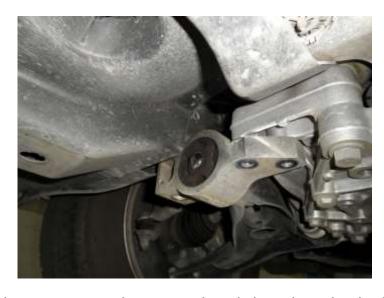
Remove Front lower control arm bolts and Rear bracket bolts
